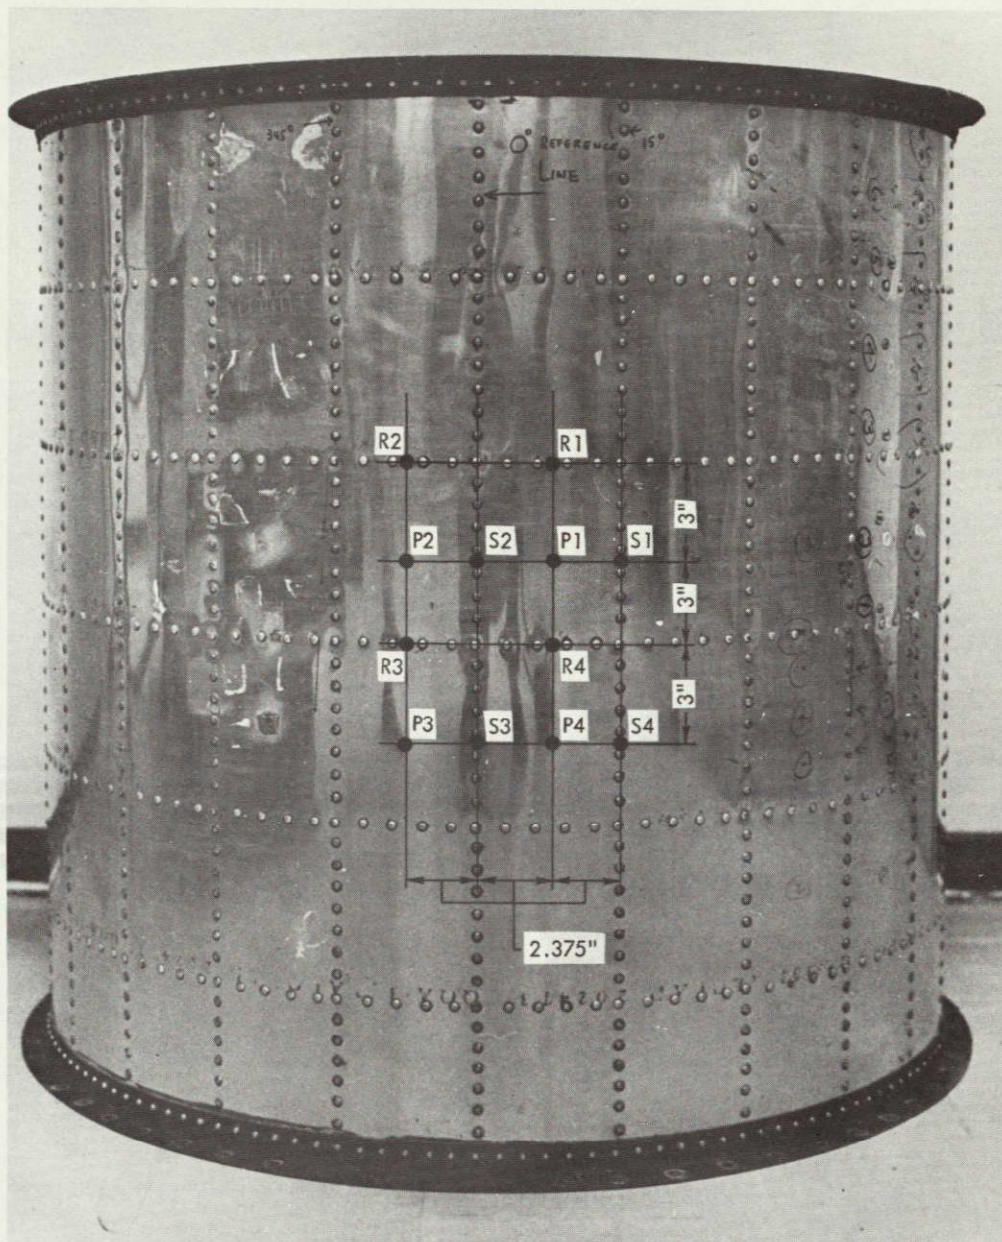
Stiffened Cylinder and Component Specimen Mounting Locations
